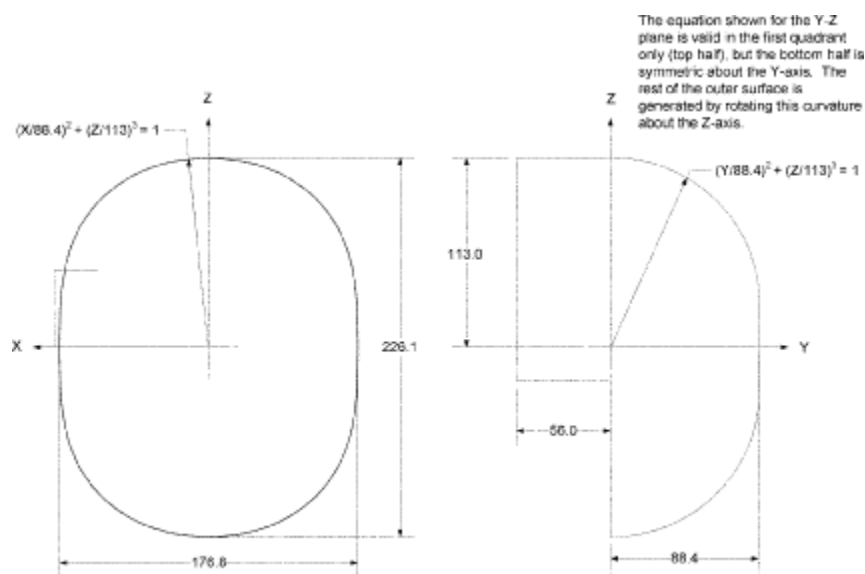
Ejection Headform Face. All dimensions are millimeters.
